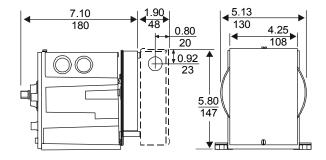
Spring Return with Switch Kit Dimensions, in. (mm)
